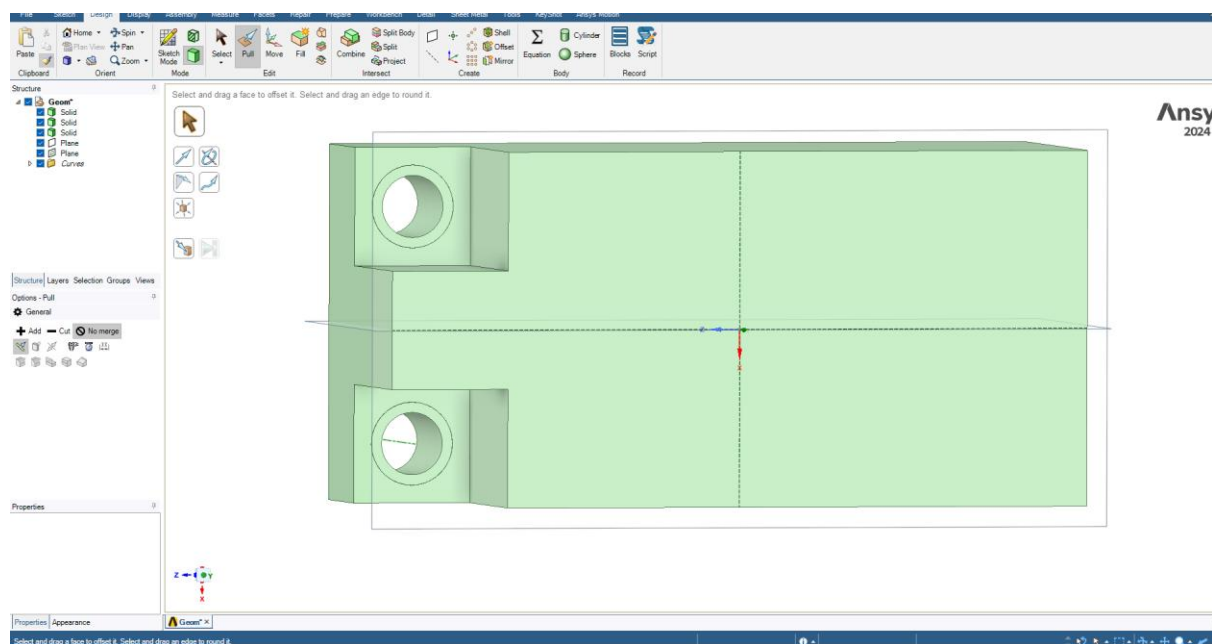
Hole Geometry Added as Separate Part of Geometry for Future Selection
